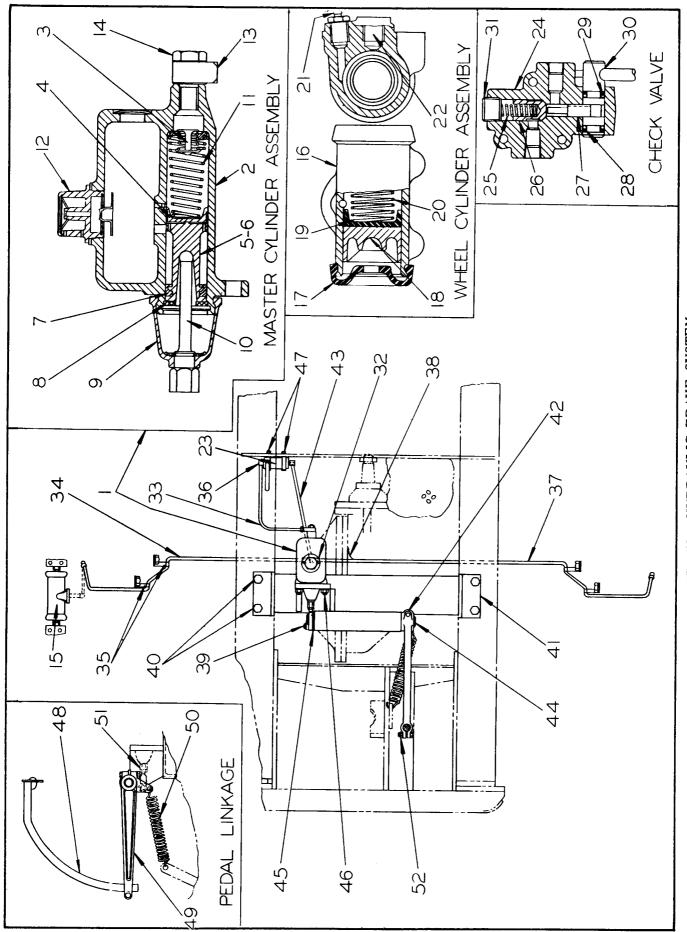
HYDRAULIC BRAKE SYSTEM
